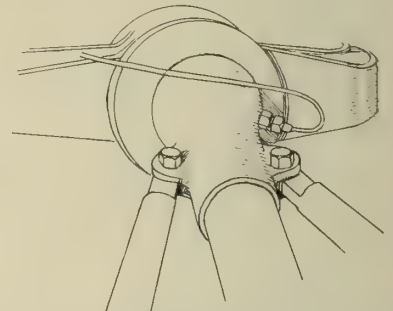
Fig. VII.—The ball ended torque rod on Mercedes chassis.
